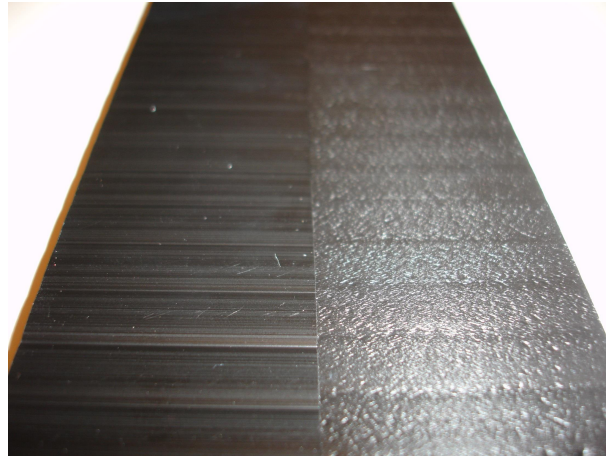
The top (left) and bottom (right) surface of the extruded sheet.
